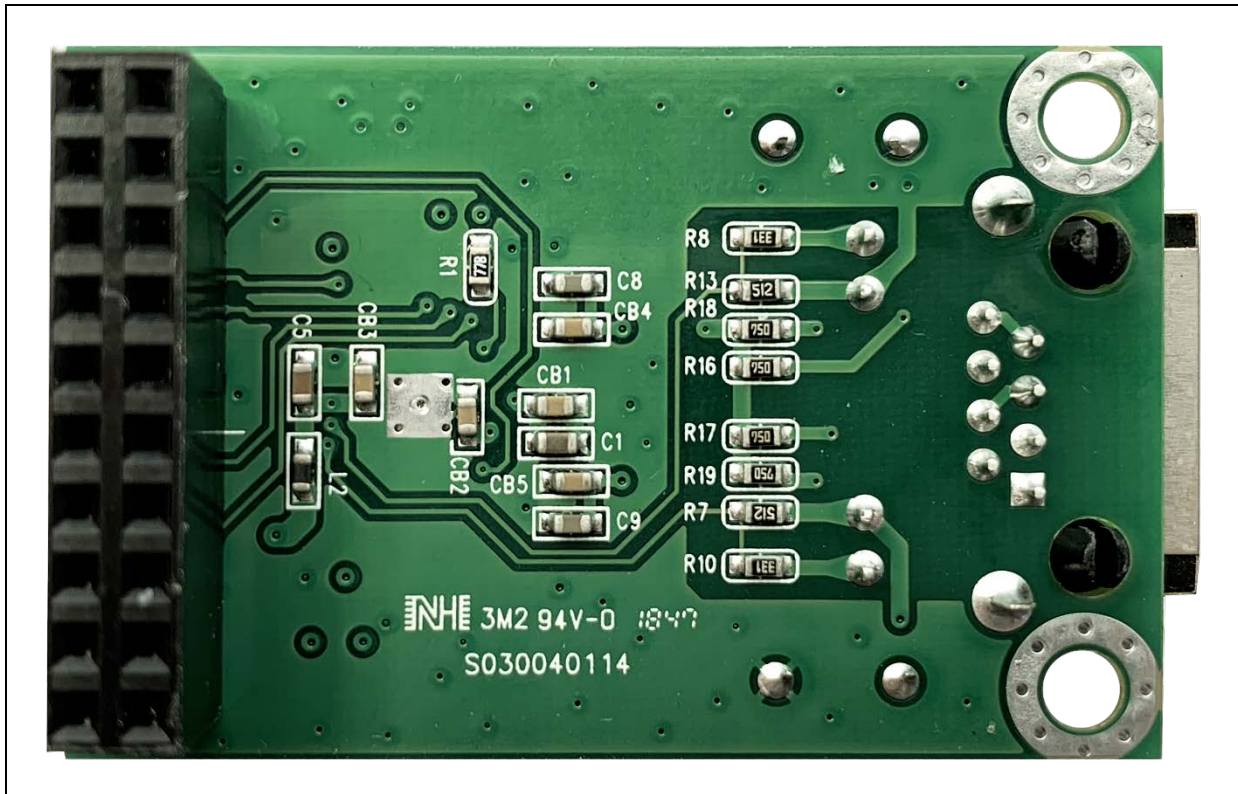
NK-NUC98R Ethernet Daughter Board (Rear View)
